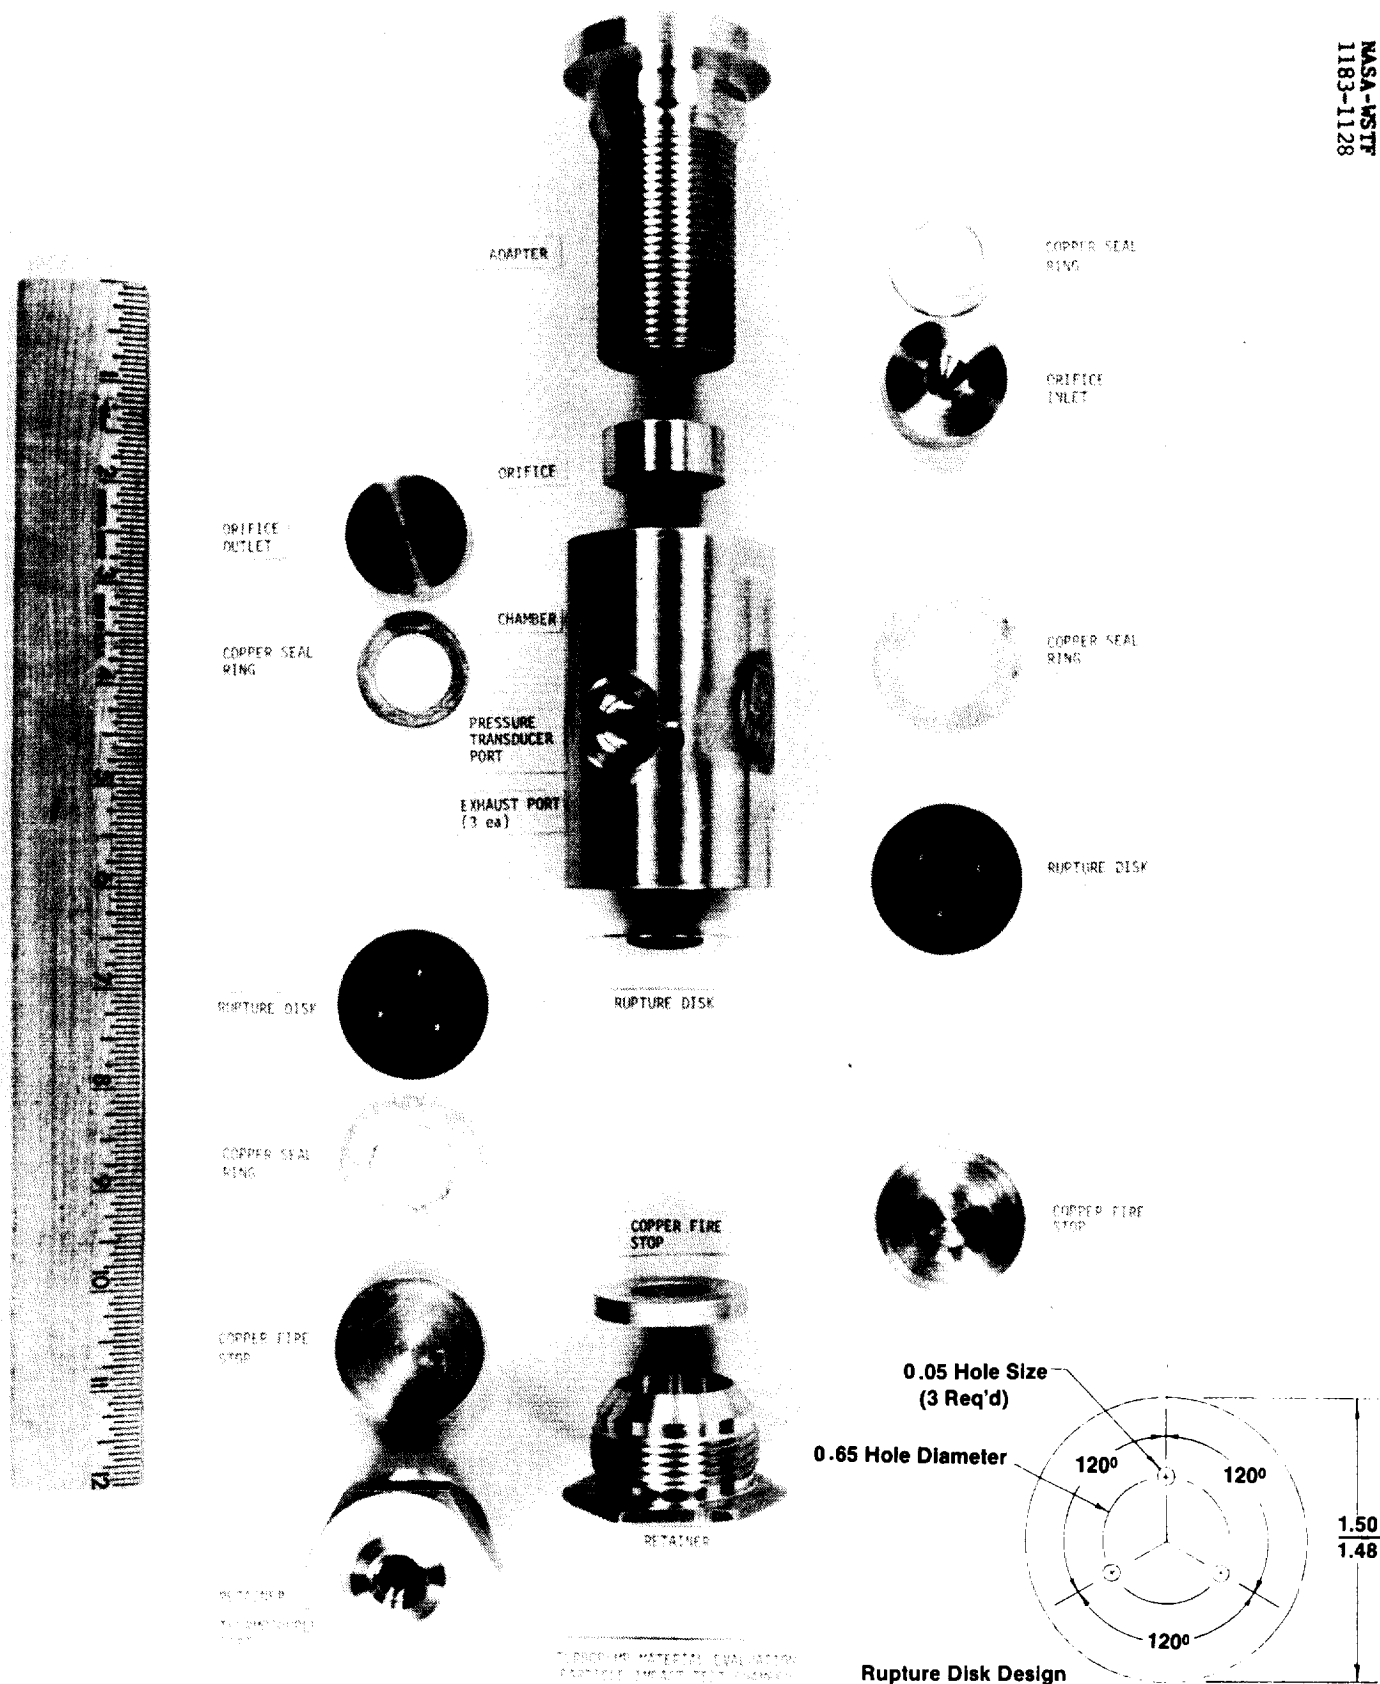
Particle Impact Test Assembly for Rupture Disk Evaluation
